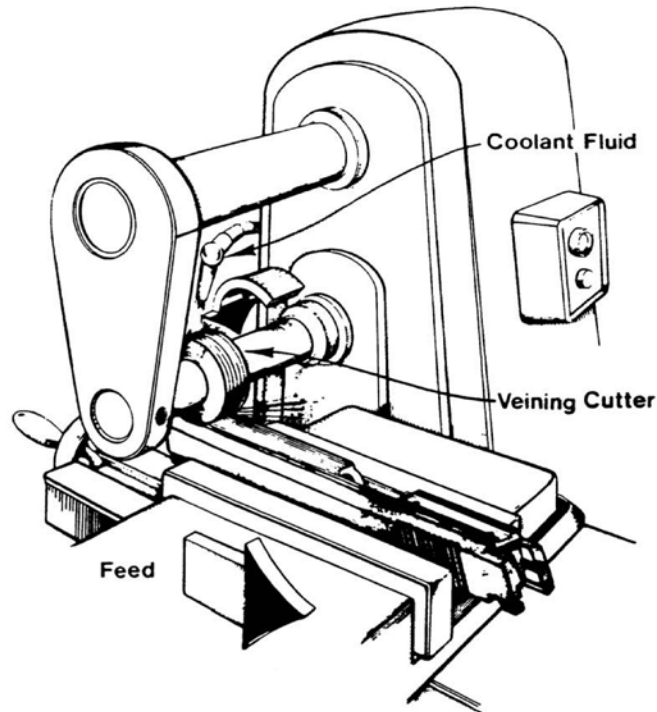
A horizontal mill fitted with a special veining cutter is sometimes used to dress the metal surfaces.
